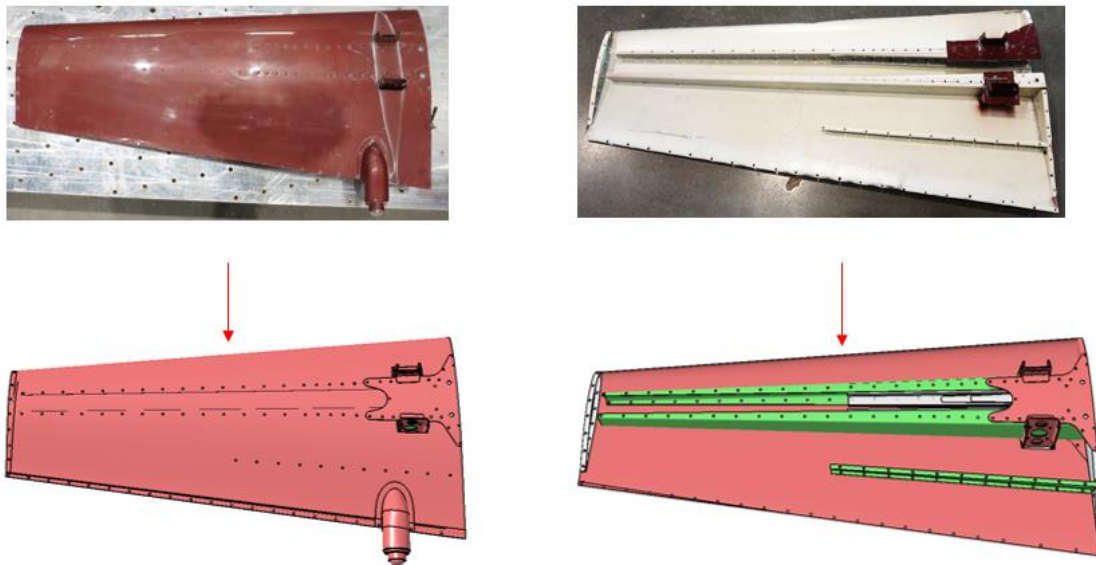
Part 27 Rotorcraft horizontal stabilizer CAD vs. physical test article.
